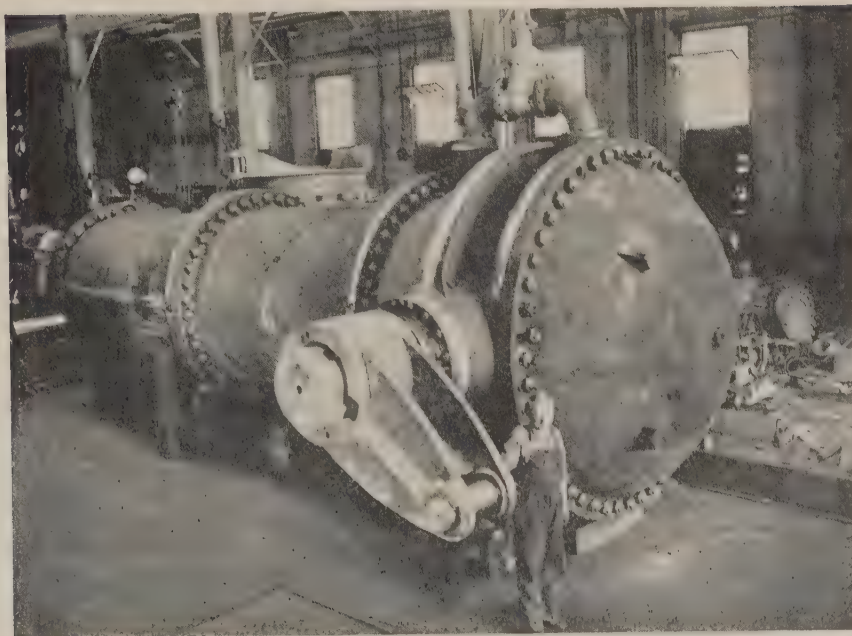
ASSEMBLY VIEW OF TURBINE-SPIRAL CASING, INLET SECTION, AND BUTTERFLY VALVE AS ERECTED IN THE SHOP FOR TESTING
